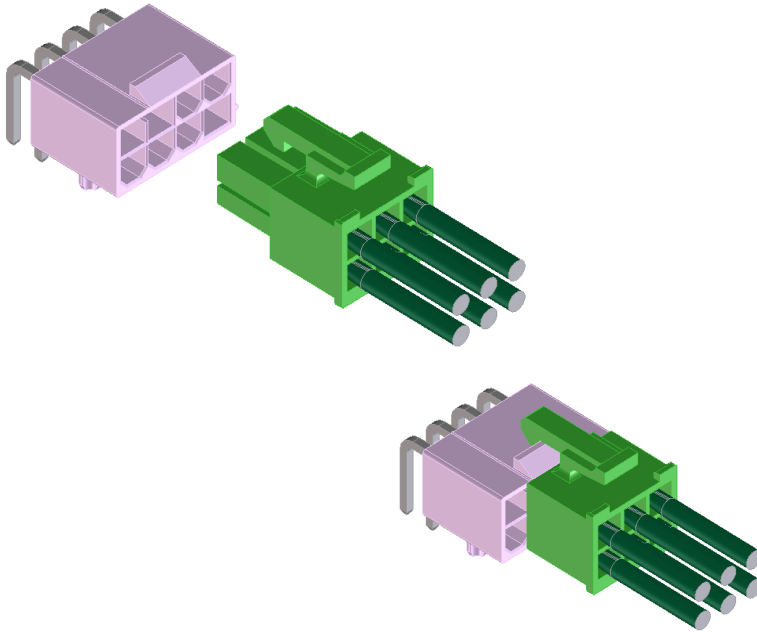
2x3 Cable Plug Mating with a 2x4 PCB Header
